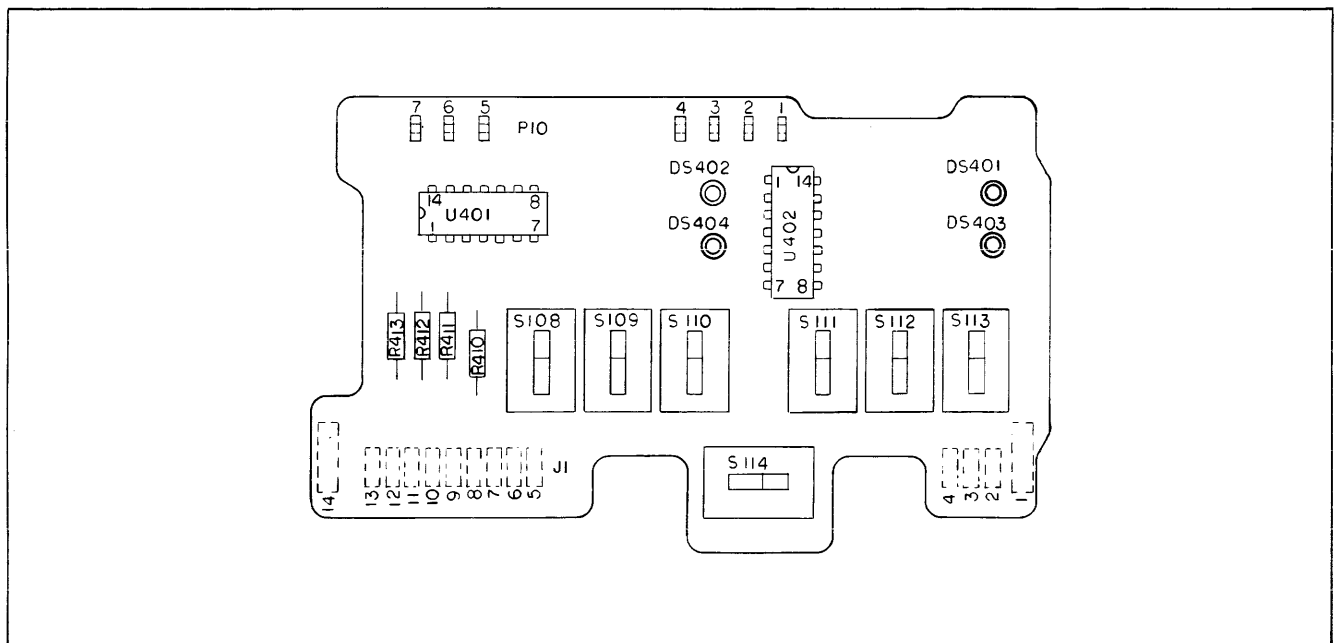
A11 Remote Control Unit #1 PCB Assembly
